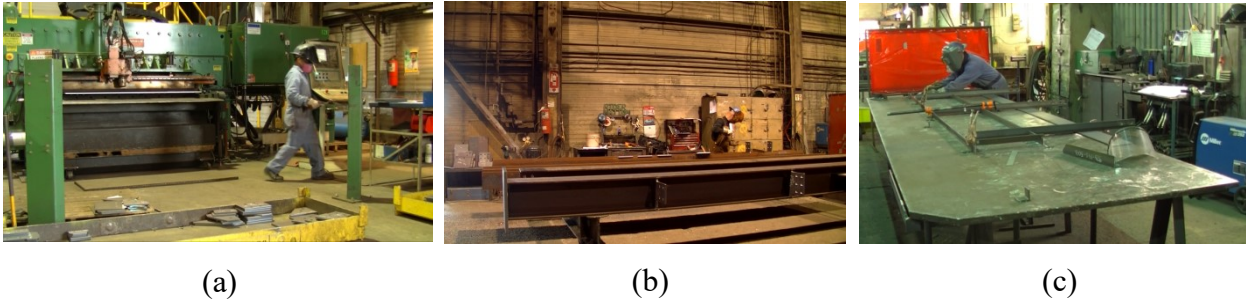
Workstations for (a) steel plate handling, (b) steel beam handling, and (c) steel ladder handling
